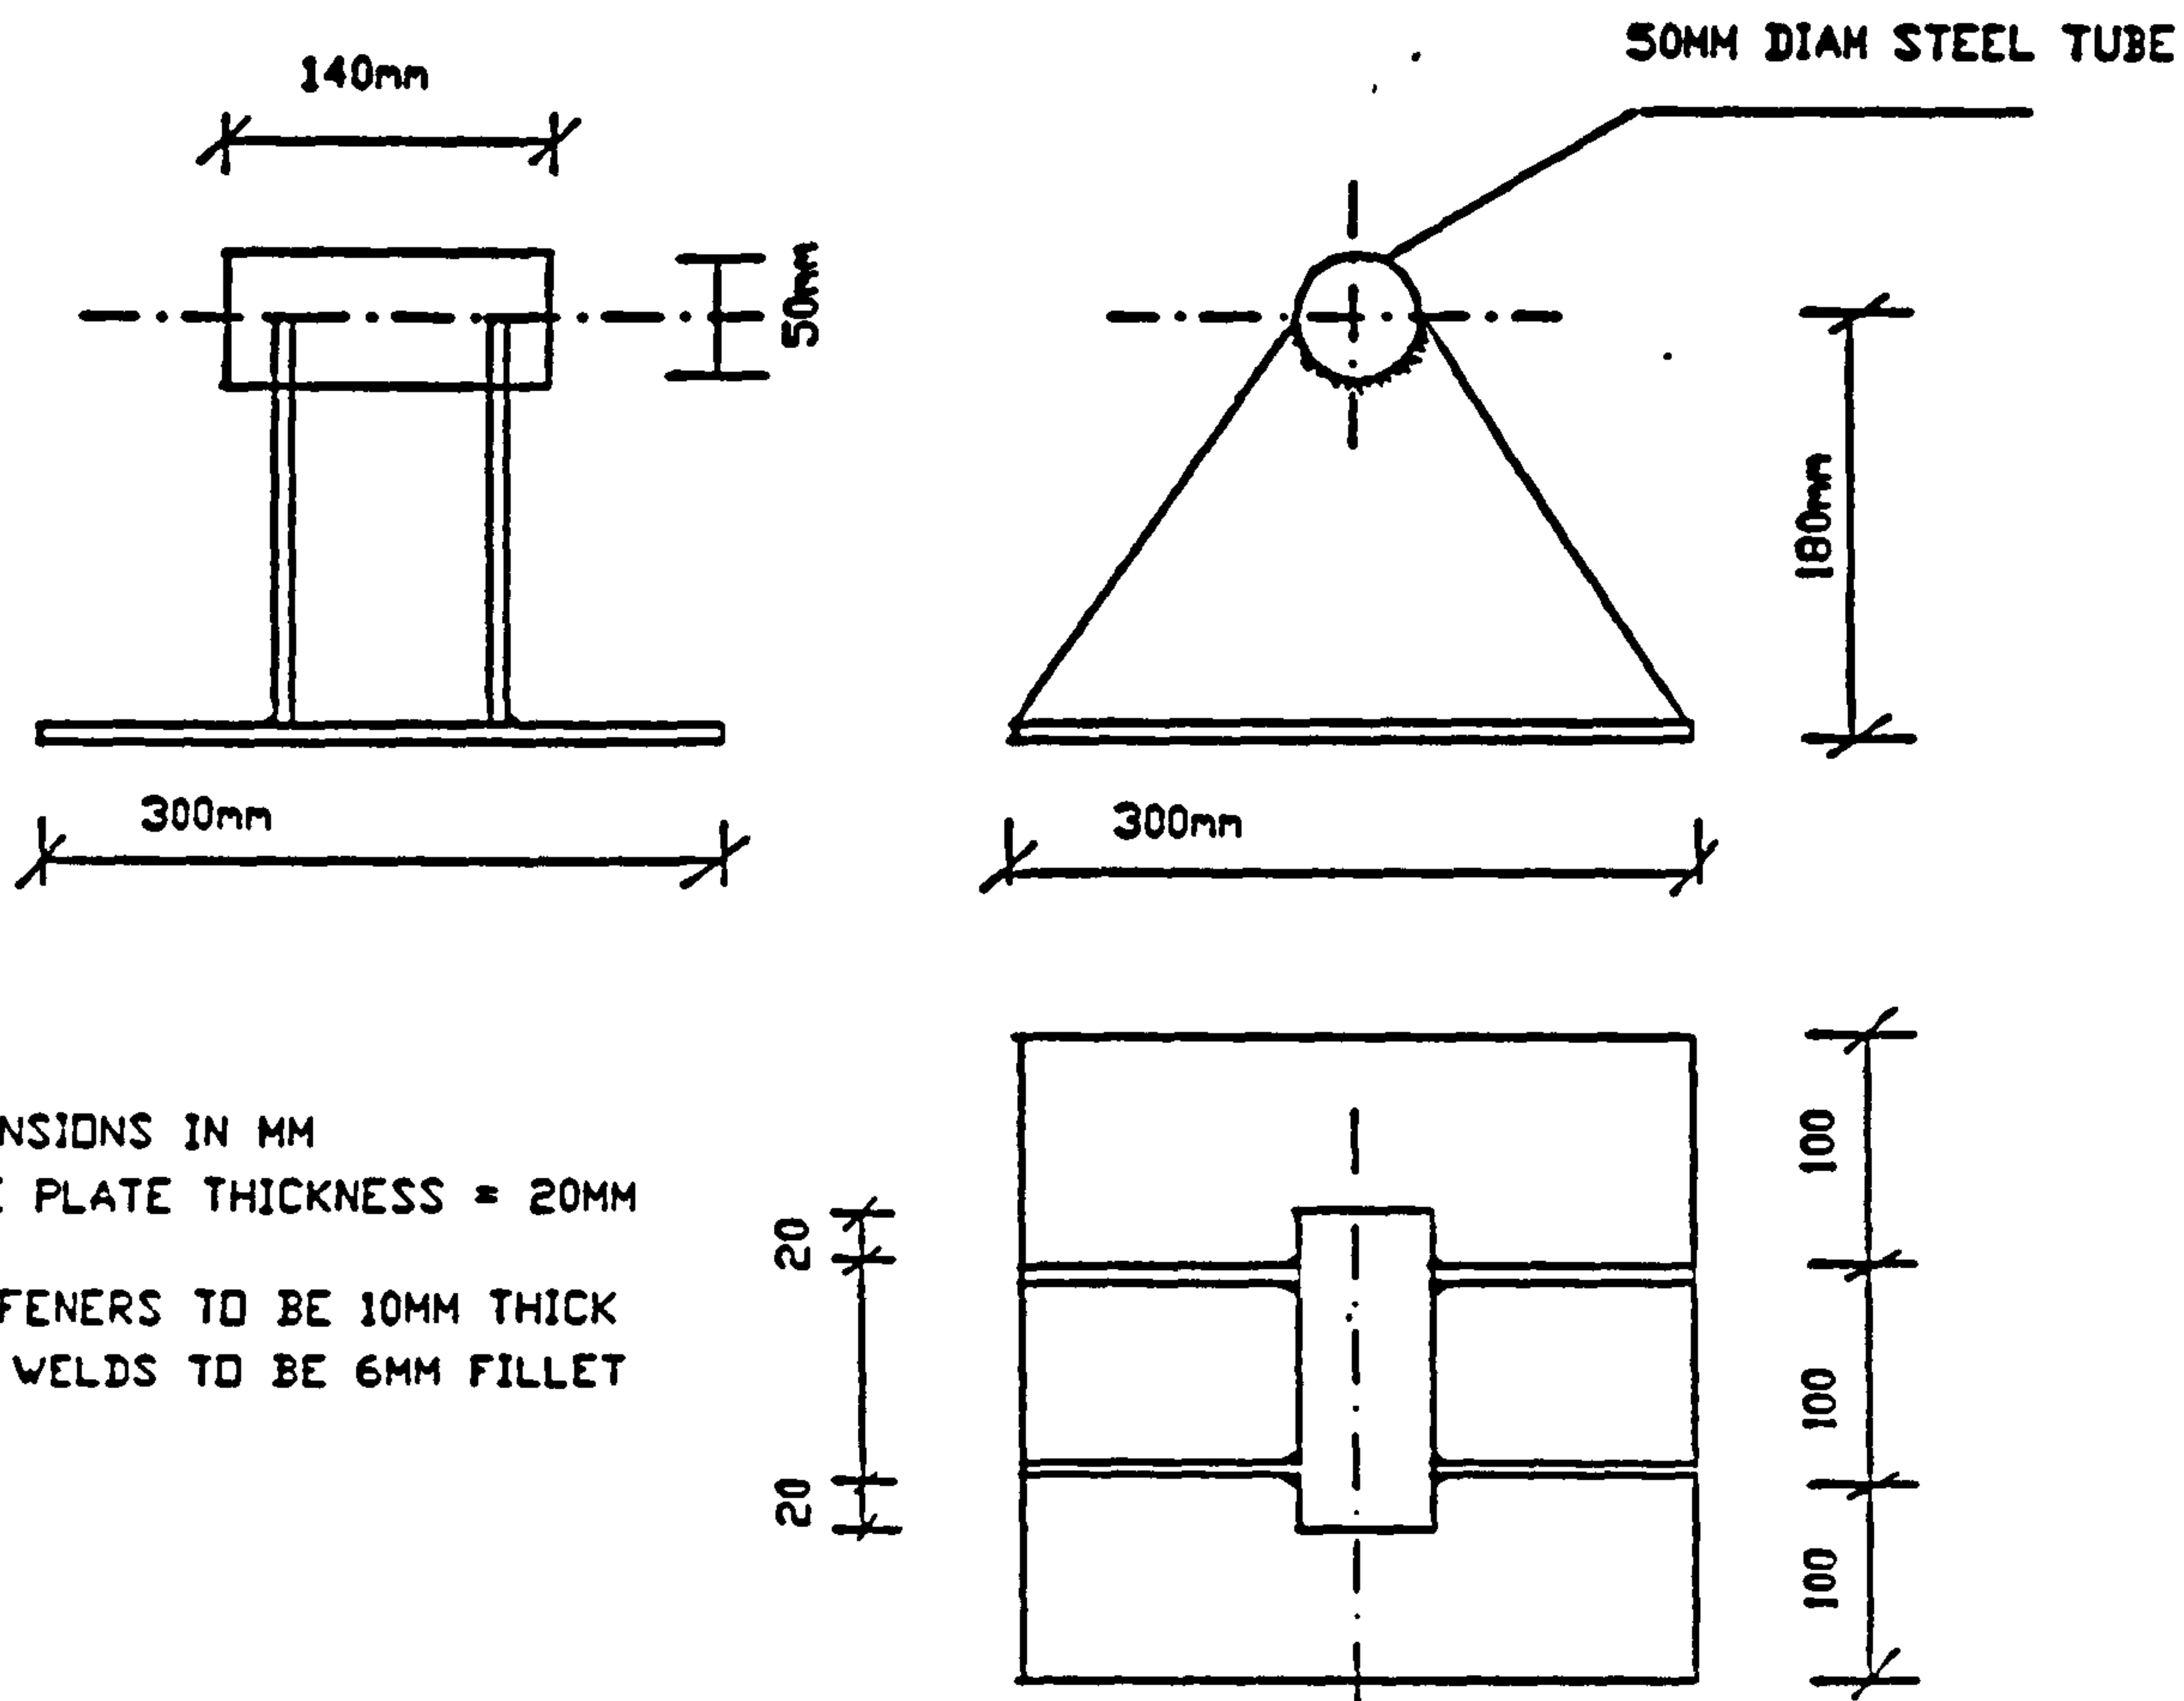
TEST JOINT LOADING JACK CONNECTION
